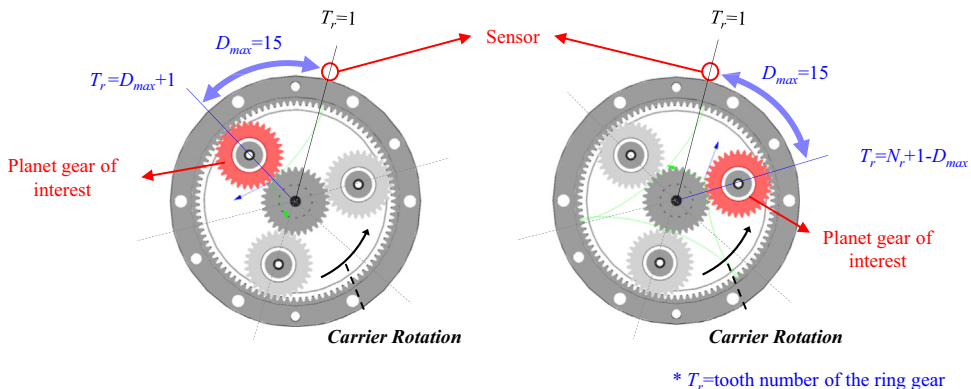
Maximum distance of the planet gear of interest to the sensor and corresponding position of the gears.
